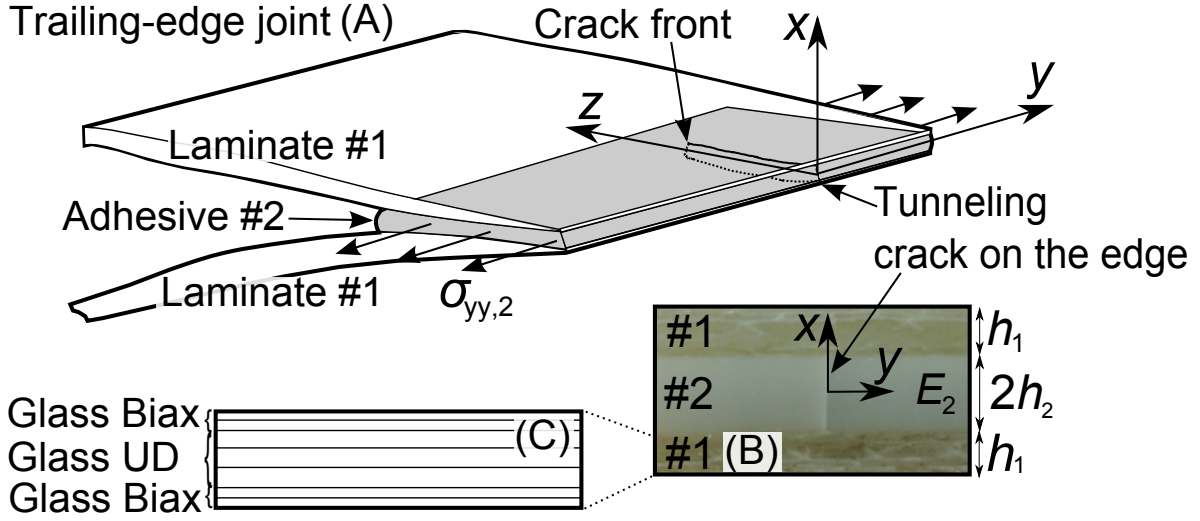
(A) Trailing-edge joint with a tunneling crack propagating across the adhesive layer in the z -direction. (B) Photo of a tunneling crack in a trailing-edge wind turbine blade joint. (C) Typical layers in a glass fiber laminate used in a wind turbine blade joint.
